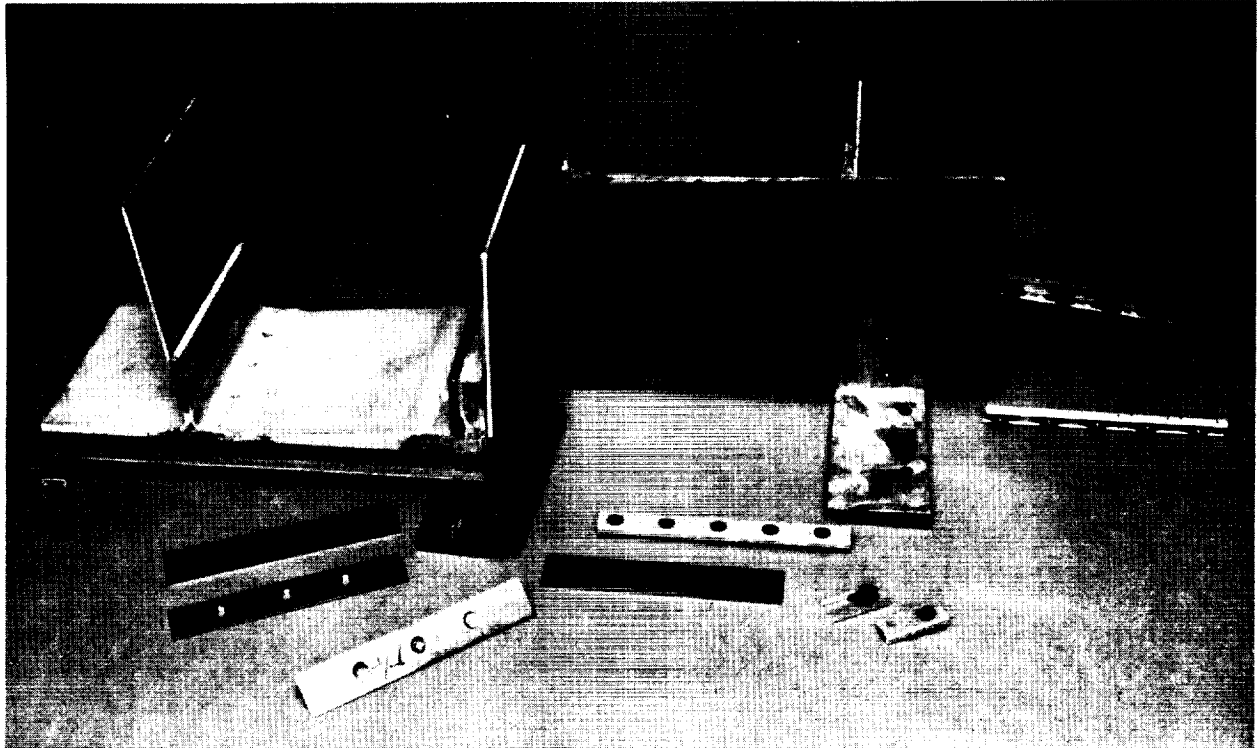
MODIFIED JOINT DESIGN SHOWING ASSEMBLY AND DETAILED PARTS
